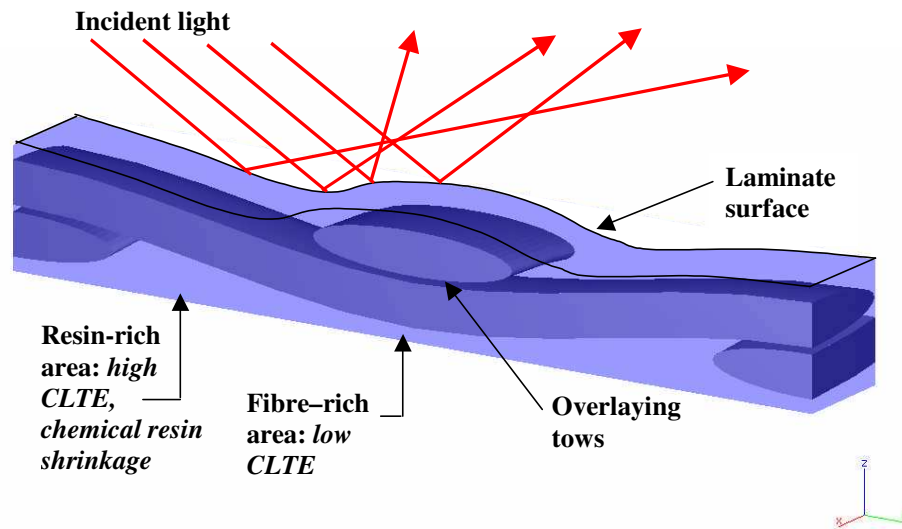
Allocation of surface defects on coated laminates [1].
